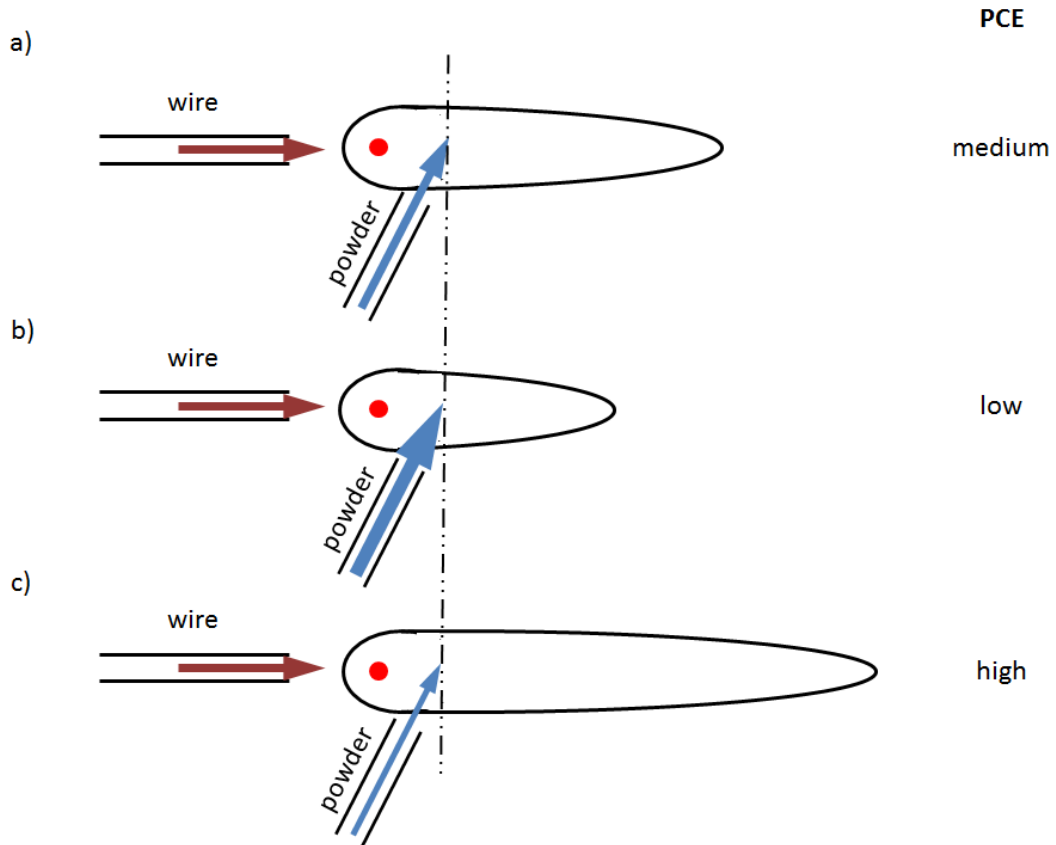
Changes in weld pool length and PCE; a) medium powder feed rate makes medium weld pool length and PCE; b) high powder feed rate cools the weld pool and the weld pool length shortens and PCE is low; c) low powder feed rate increases the weld pool length and the PCE
